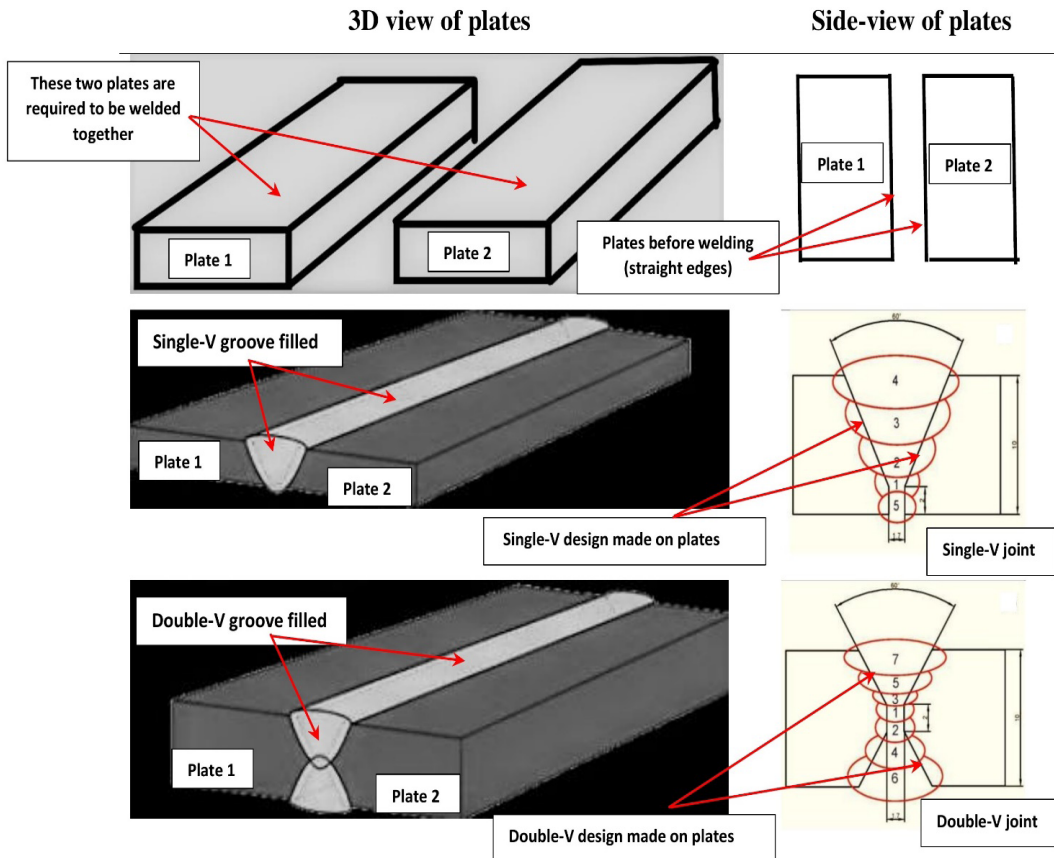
Diagrams of two types of weld joint designs used in the present work.
